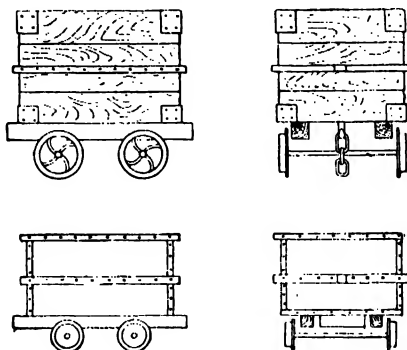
Side and End Views of Wood and Iron Coal Tubs
